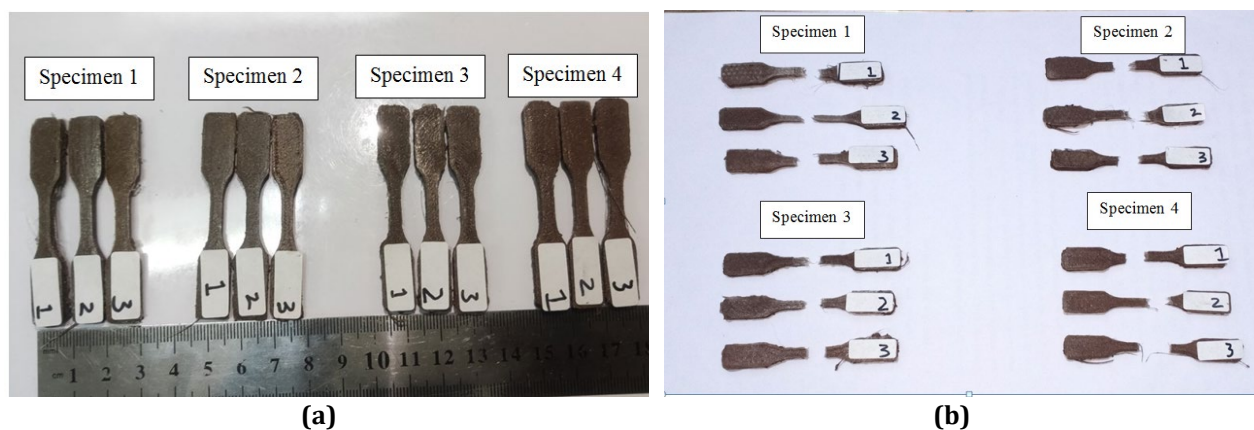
Specimen (a) Before; (b) After the tensile test result
